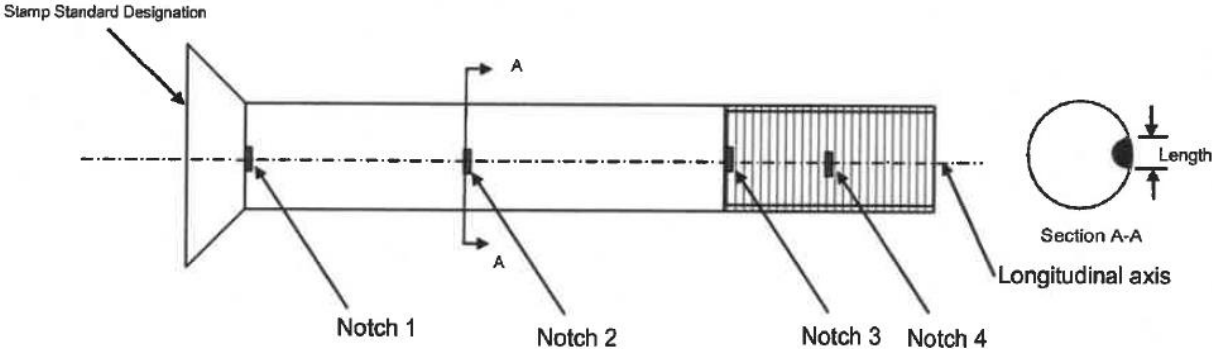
Threaded Fastener Reference Standard (Notch 4 and 4 at Thread Root)
